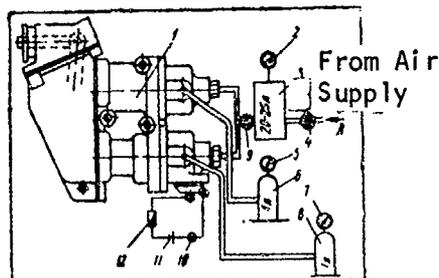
Installation for Testing of Combined Brake Valve: 1, brake valve being tested; 2, 5 and 7, manometers; 3, 6 and 8, air cylinders; 4, bypass valve; 9, three-way valve; 10, test lamp; 11, power supply; 12, 5 a fuse: A, air supply from source
